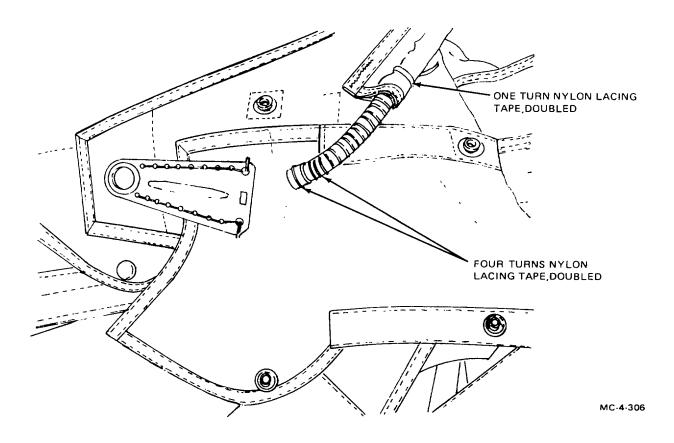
Main Ripcord Housing, Lower Tackings.
